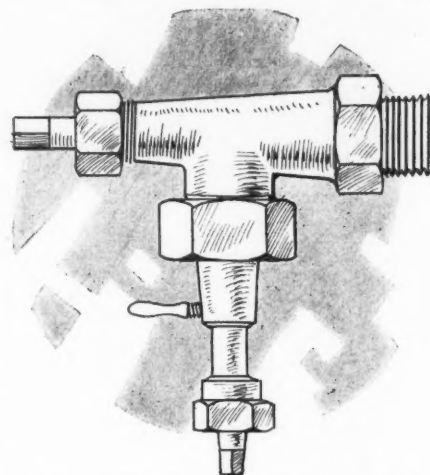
OIE ACETYLENE REGULATOR VALVE
